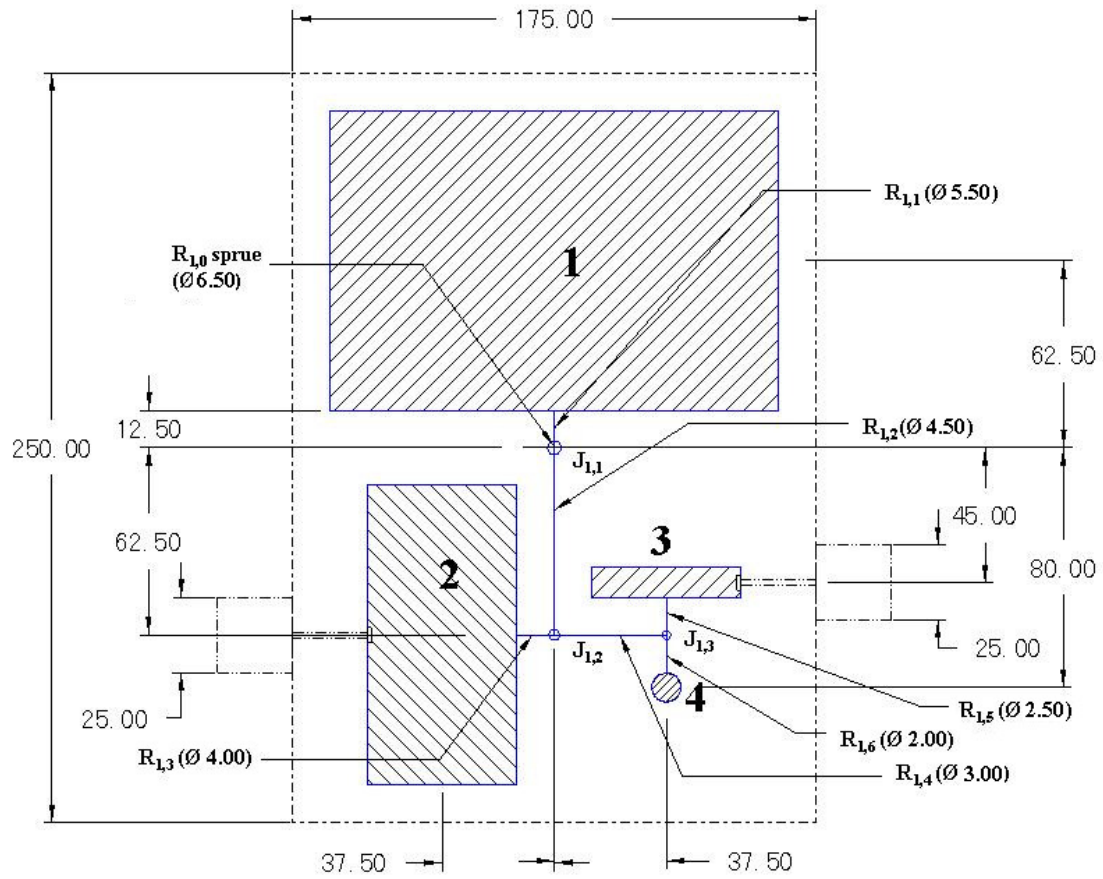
The FMCRLD drawing generated by the ICMLDS prototype
